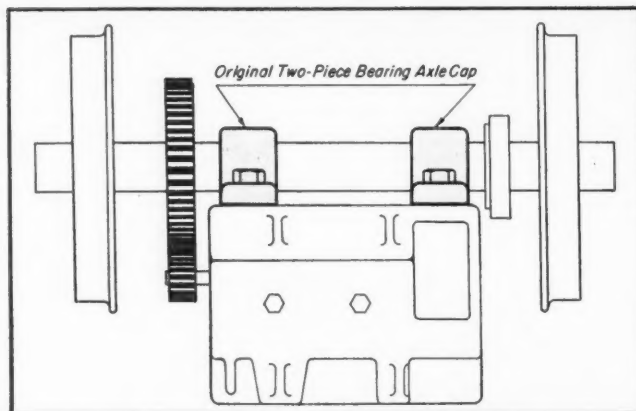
TWO-PIECE axle-bearing cap construction does not offer the rigidity found in the one-piece construction (Fig. 5). Under heavy shock loading, it is more susceptible to loosening and misalignment and also is more easily broken than the solid one-piece axle-bearing cap. In rebuilding older motor frames, replacement of the two-piece cap is a definite improvement.
